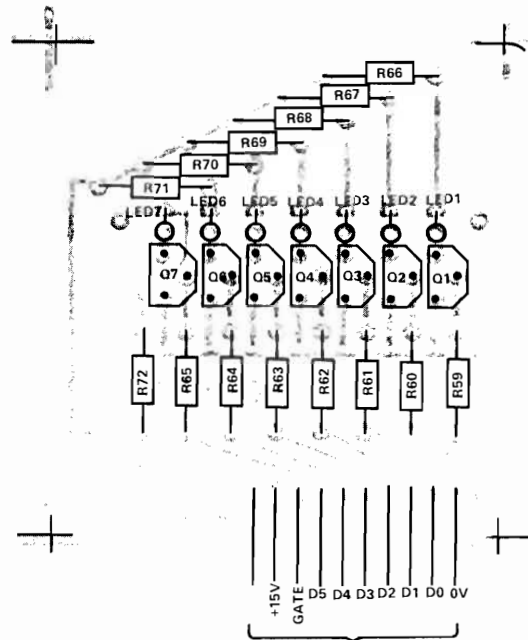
Component overlay of the keyboard controller status indicator. CONNECTS TO PCB 80-15D2
